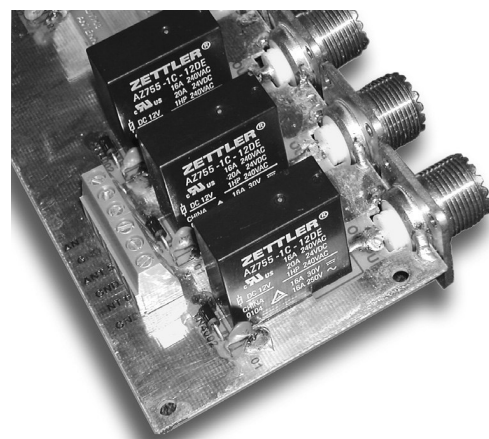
Connector flanges are soldered to the board's ground plane top and bottom. The ground ends of D1-D6 and C1-C6 are also soldered top and bottom. The relays have two pins each for the contact connections. Solder all pins and install eyelets supplied with the FAR Circuits board to ensure good connections for the relay common and normally closed pins.
